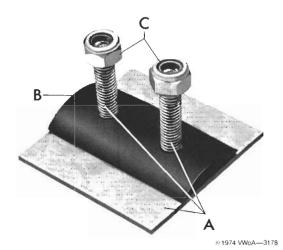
Stud plate assembly A. The rubber seal is at B; the self-locking nuts are at C. The studs are welded to the plate, but the rubber seal can be removed.
